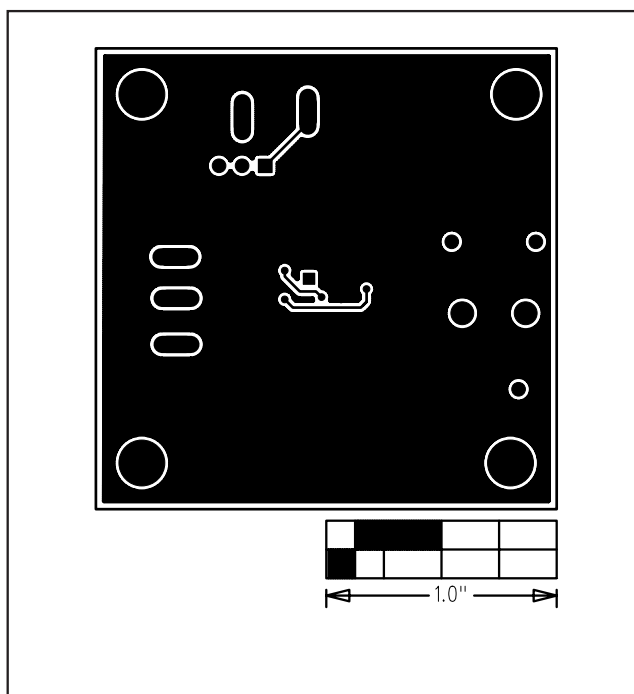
MAX9724A EV Kit PCB Layout—Solder Side
